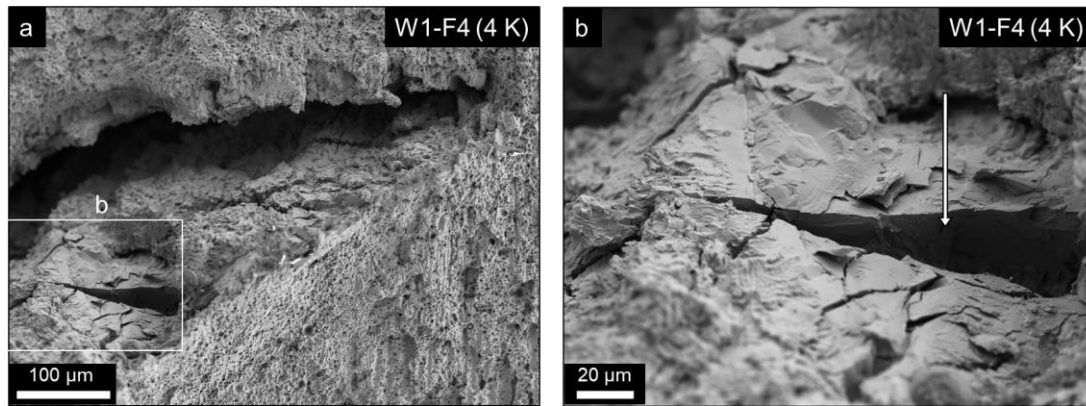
a) Crack jump displaying a large cleavage-based fracture morphology, b) enhanced view of the cleavage feature.
